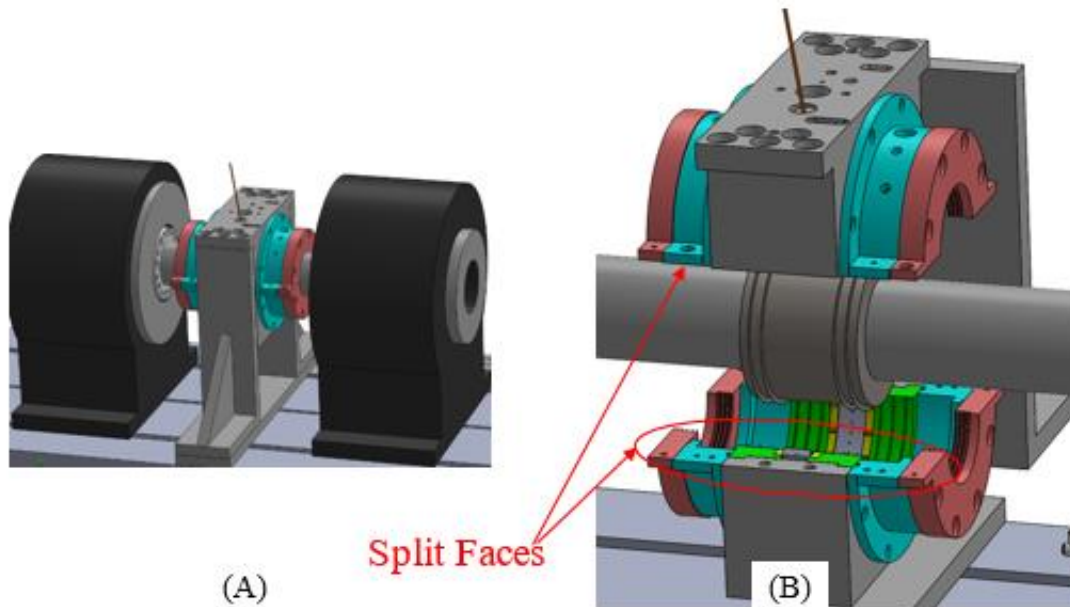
CAD model of (A) fully assembled test rig, and (B) an exploded view of the test rig showing the top and bottom stator halves. Reprinted from [14].
